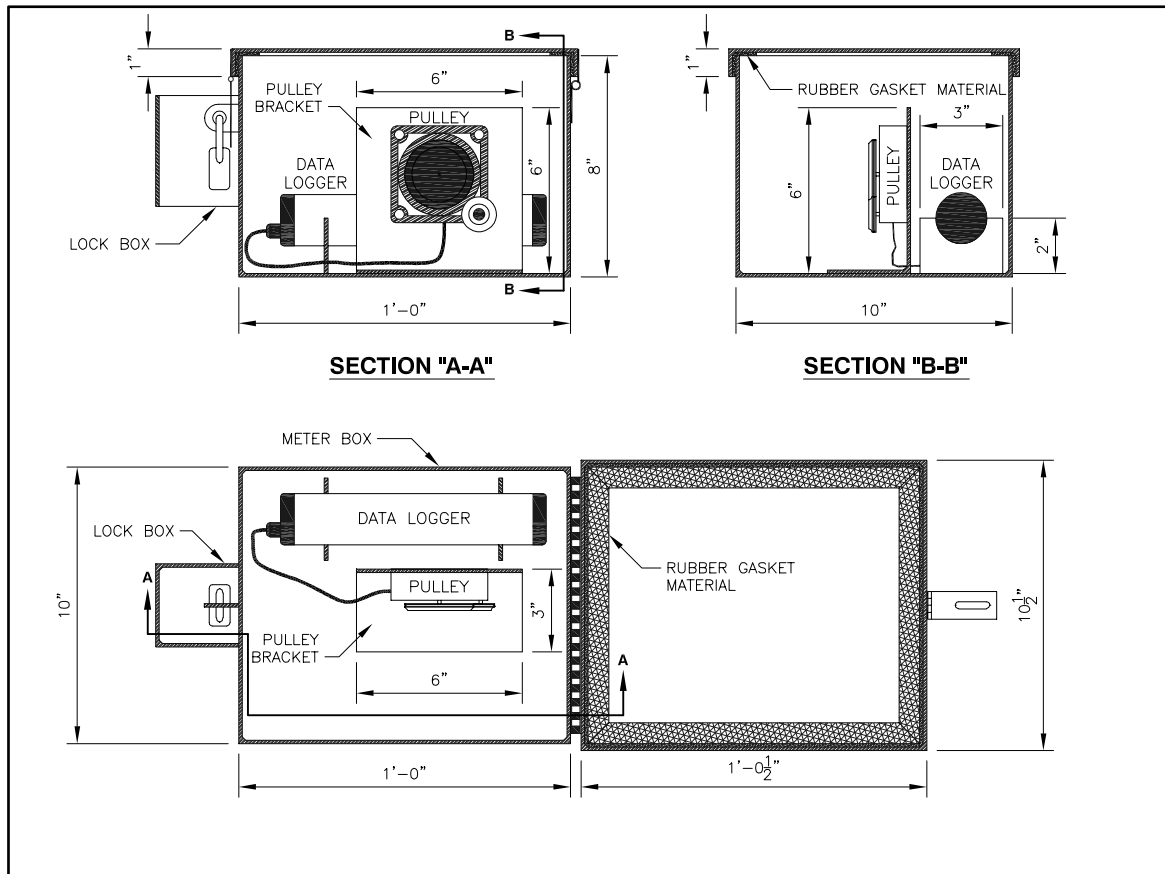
Construction drawing for the instrument housing unit used on the static marsh mat continuous recorder system.
